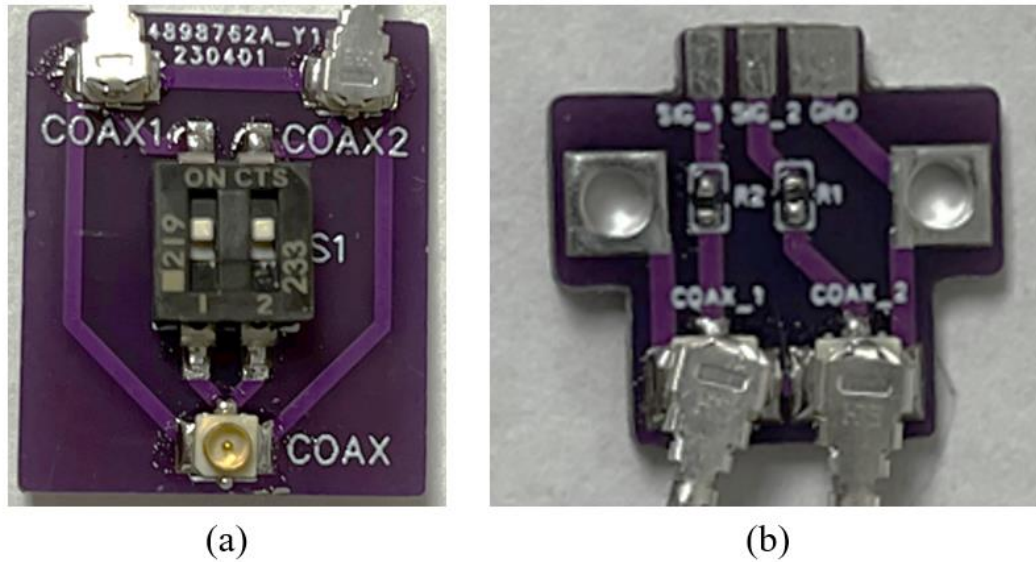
(a) Switch board PCB. (b) Dual bias array PCB.
